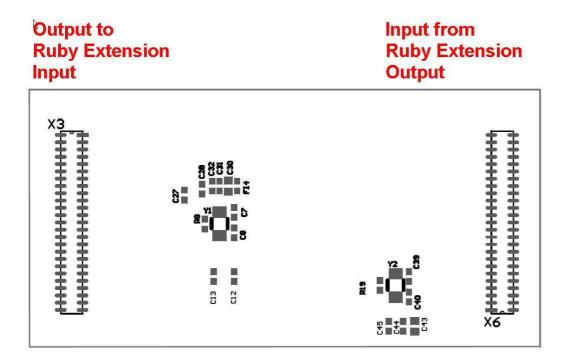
Interfaces on the Video In Adapter Board 02 bottom side
